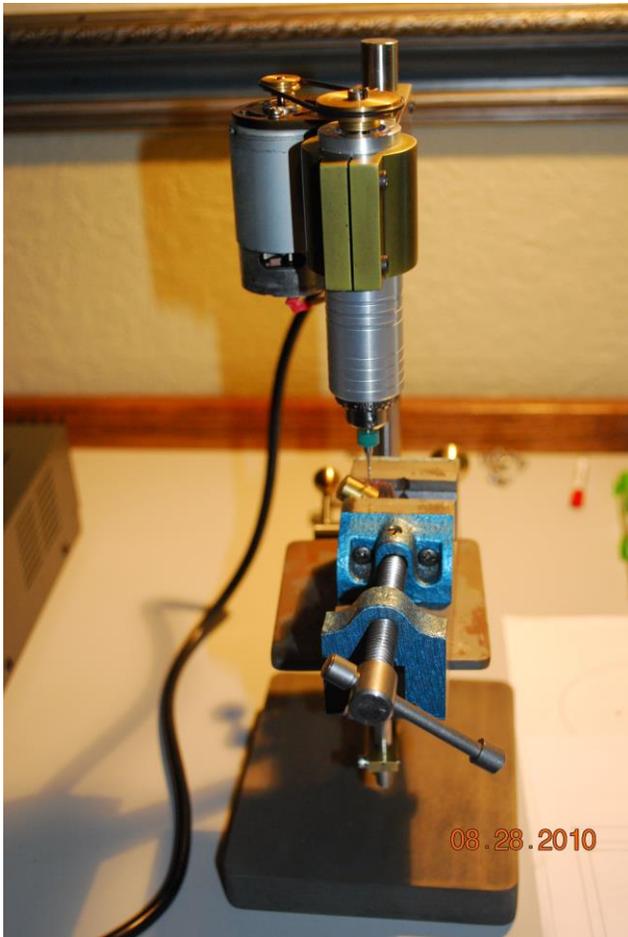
The fusee iron mount is held at a 65-degree angle to drill a hole for the fusee iron spring. A miniature drill press is handy for drilling small holes like this. The table moves up to feed the work to the bit. The spindle assembly is a Fordom rotary handheld unit driven by a DC motor from a surplus battery-powered drill. An adjustable power supply provides a speed range of approximately 2000-20,000 RPM.
